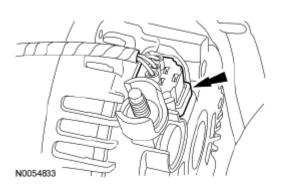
Locating Generator Electrical Connector Courtesy of FORD MOTOR CO.
